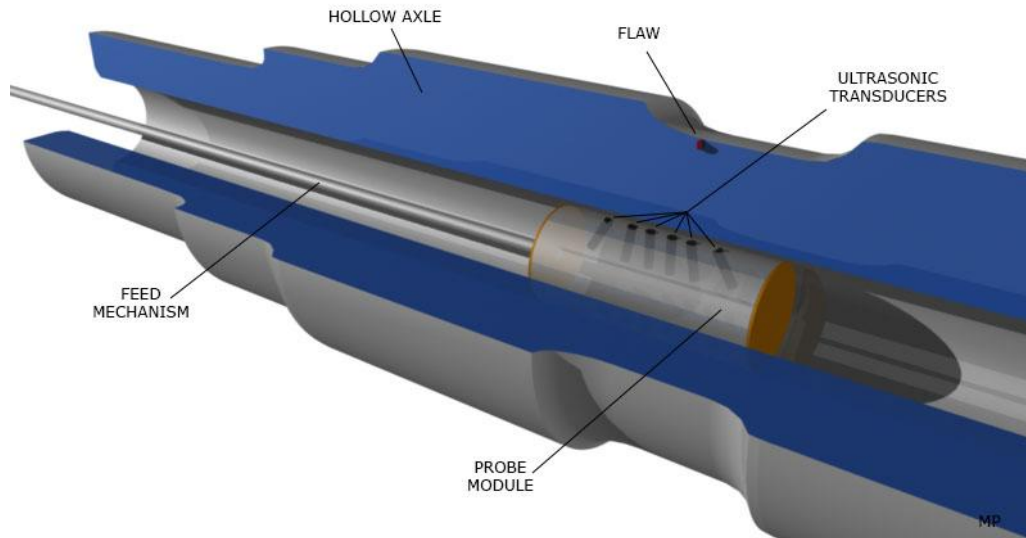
Cross section of the hollow axle with a probe module in the borehole.
